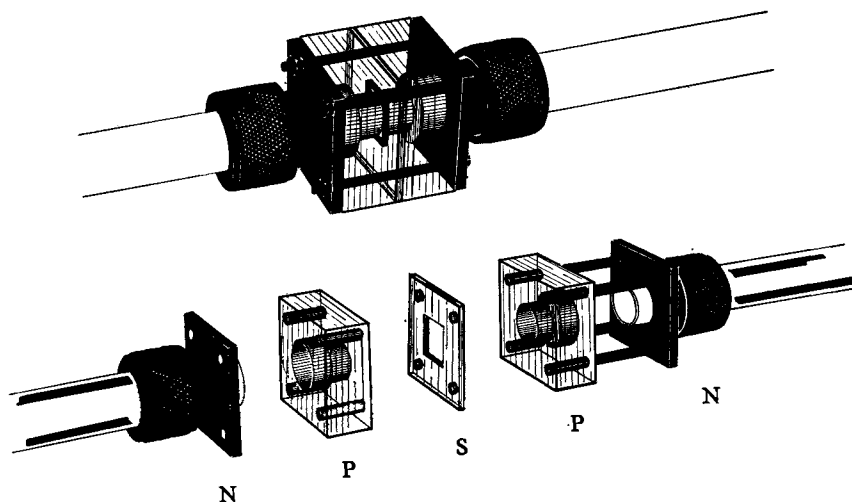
Exploded view of scanning device. S, Square scanning section (Perspex); P, Perspex blocks; N, glass tube seals (brass).
